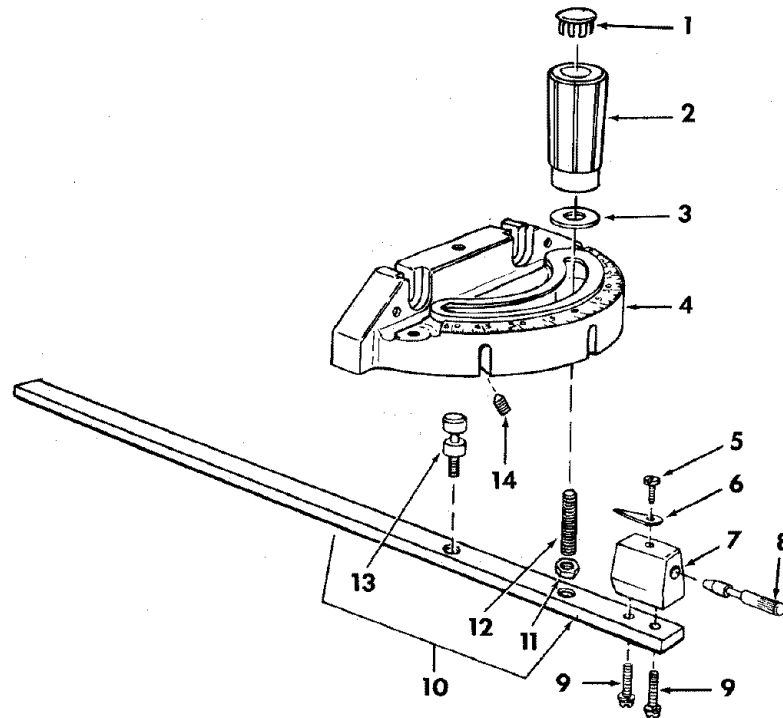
62704 MITER GAUGE ASSEMBLY
